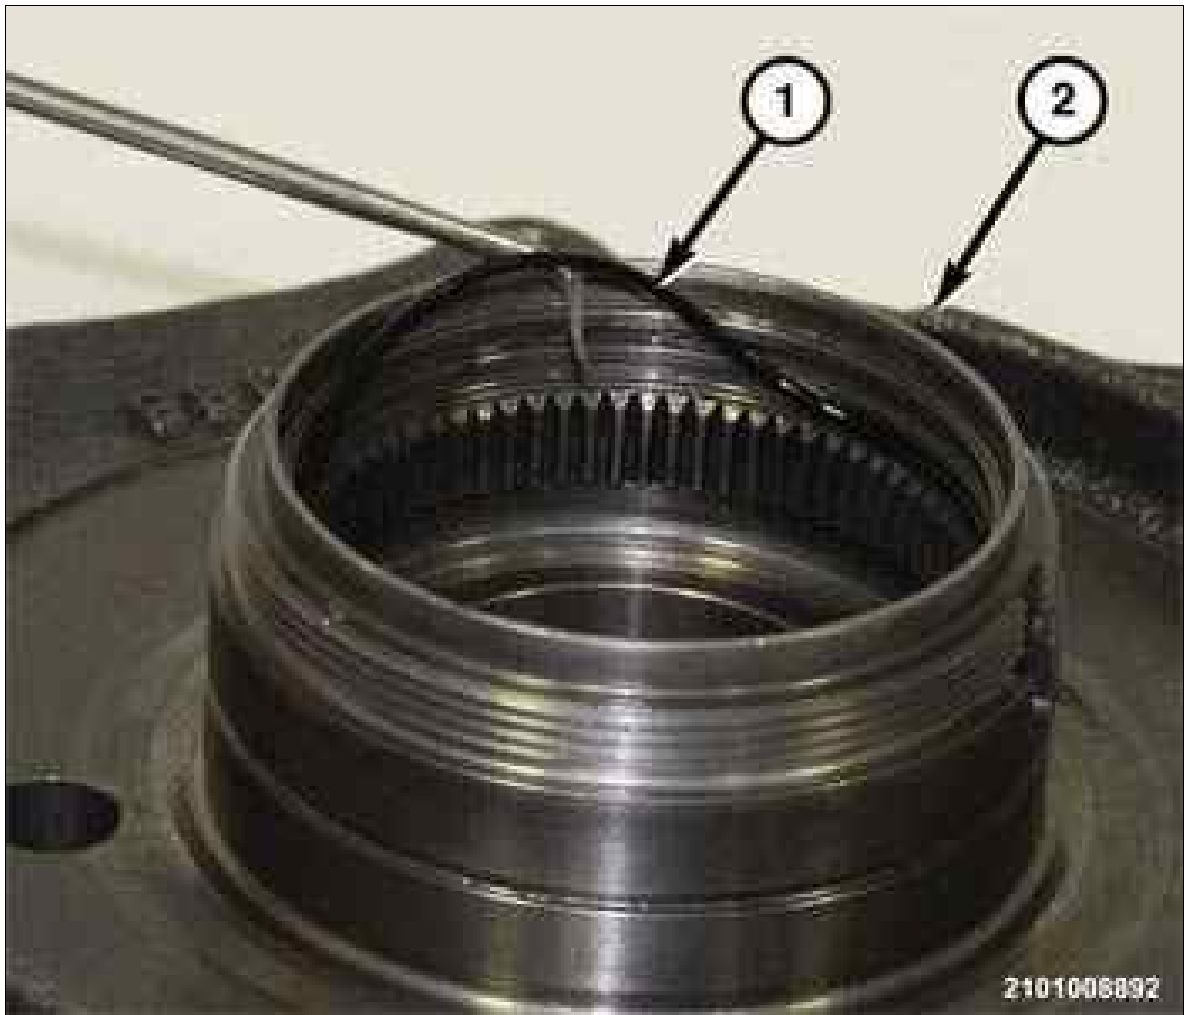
Dog F-Clutch Piston & Inner O-Ring Seal
